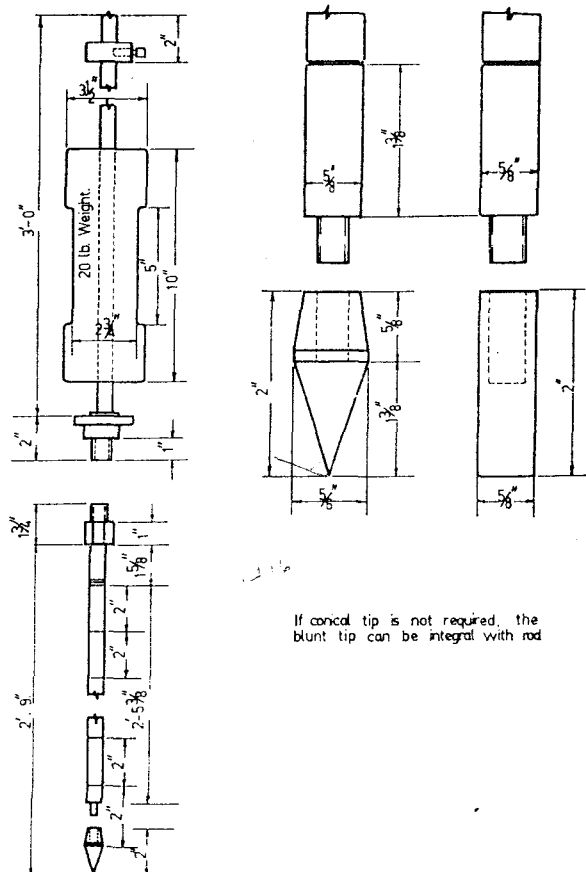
Detailed Dimensions of the Falling Weight Penetrometer.
